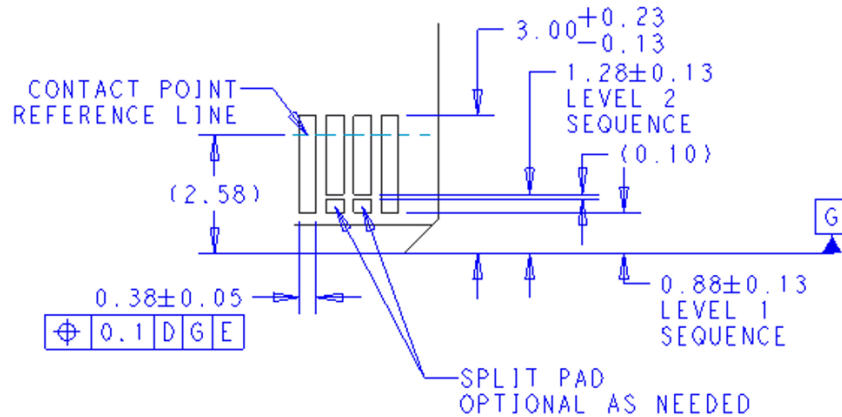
AIC 4C+ MATING CARD DIMENSIONS (MM)
